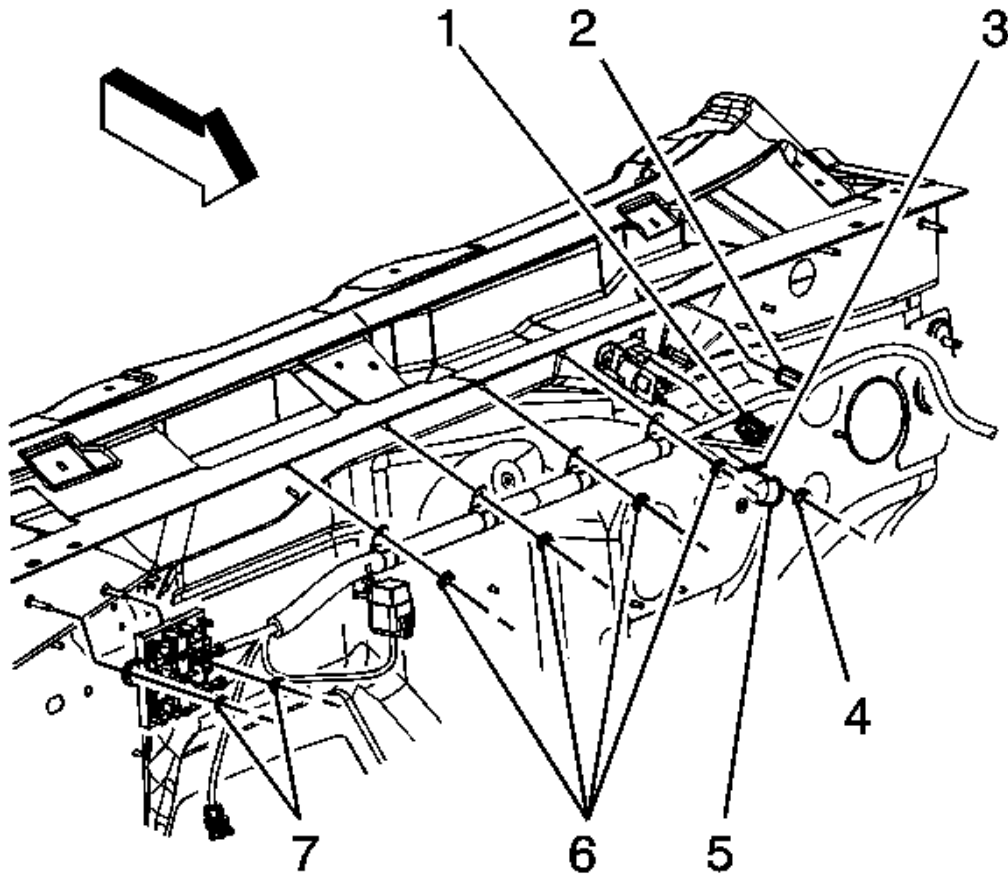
View Of Battery Cable Nuts, Retainers & Bolts
